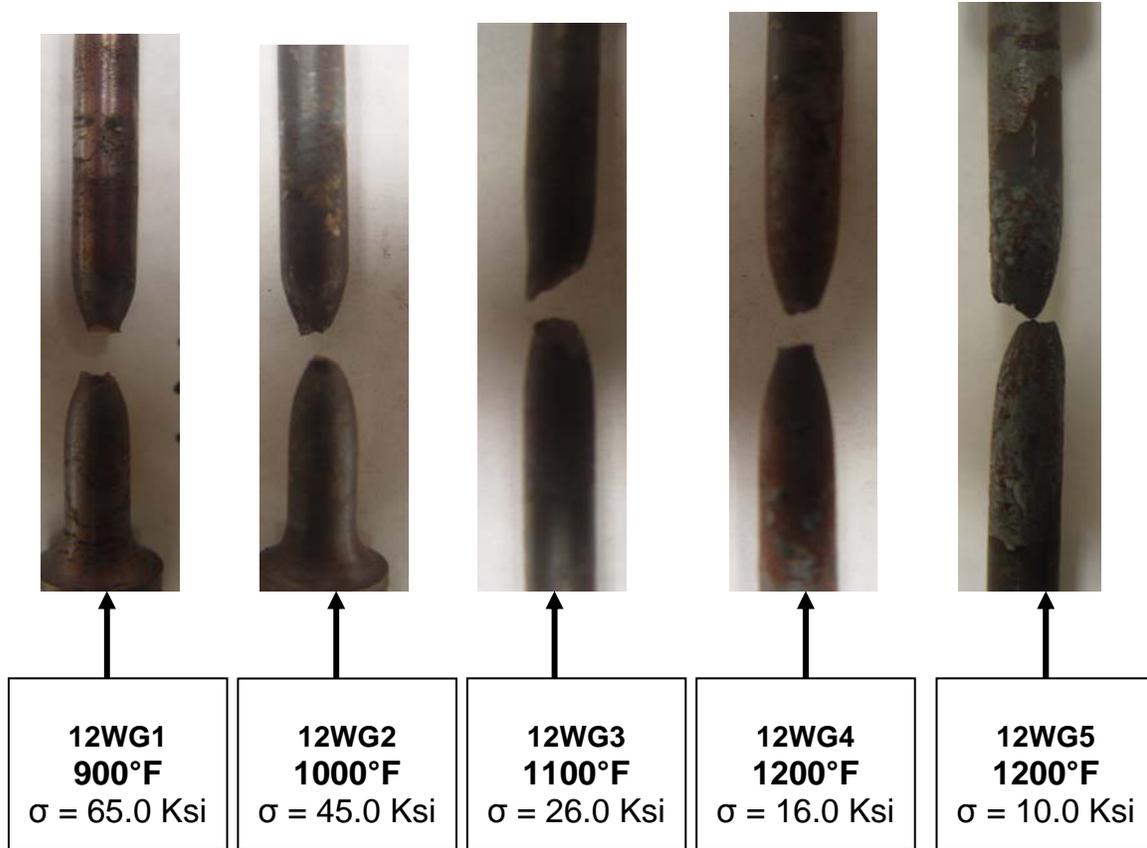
Creep-tested weldment specimens from submerged arc weld 12WG1.
